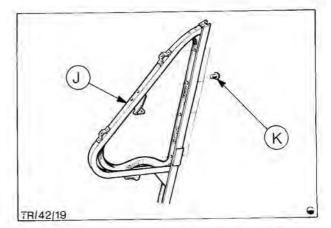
Rivet assembly, quarter window weatherstrip to dividing bar
